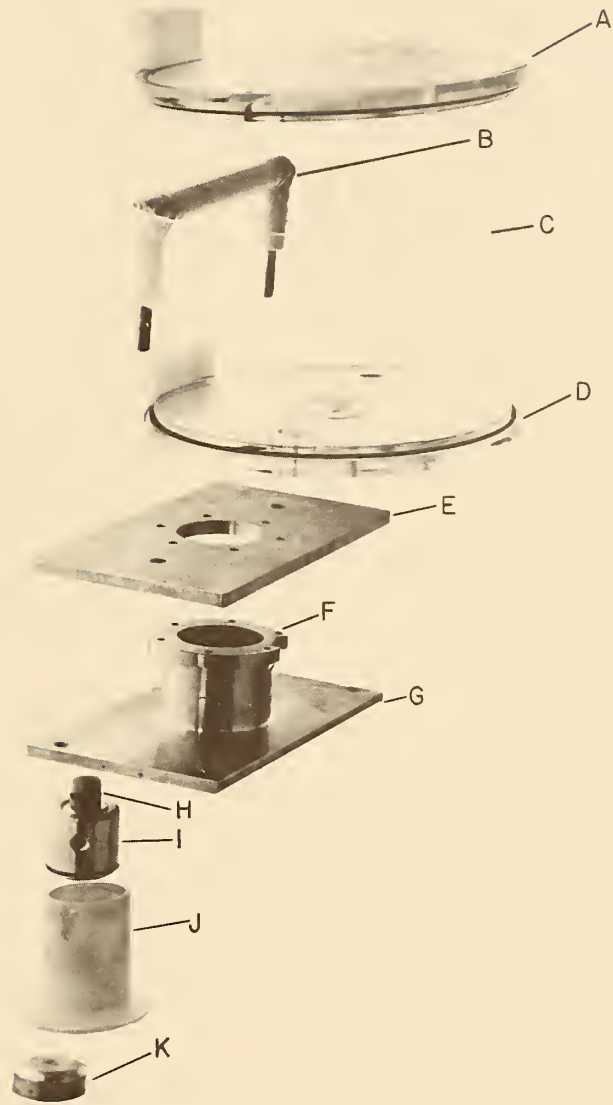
EXPLODED VIEW OF CYLINDRICAL SHOCKDRIVER
